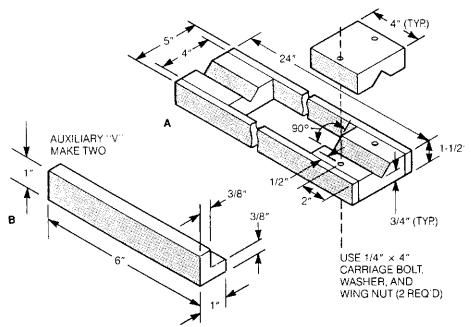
Construction details of the (A) extension V-block and (B) the auxiliary V's. The shape needed is actually a rabbet cut.
